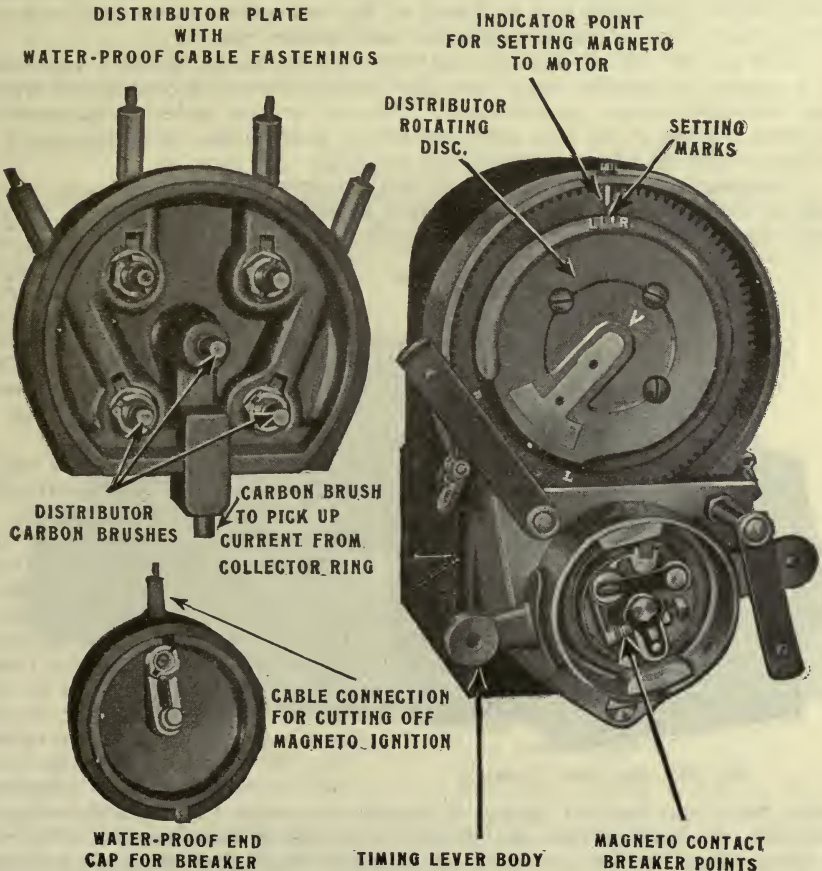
Disassembled view of Eisemann G4 Magneto.
